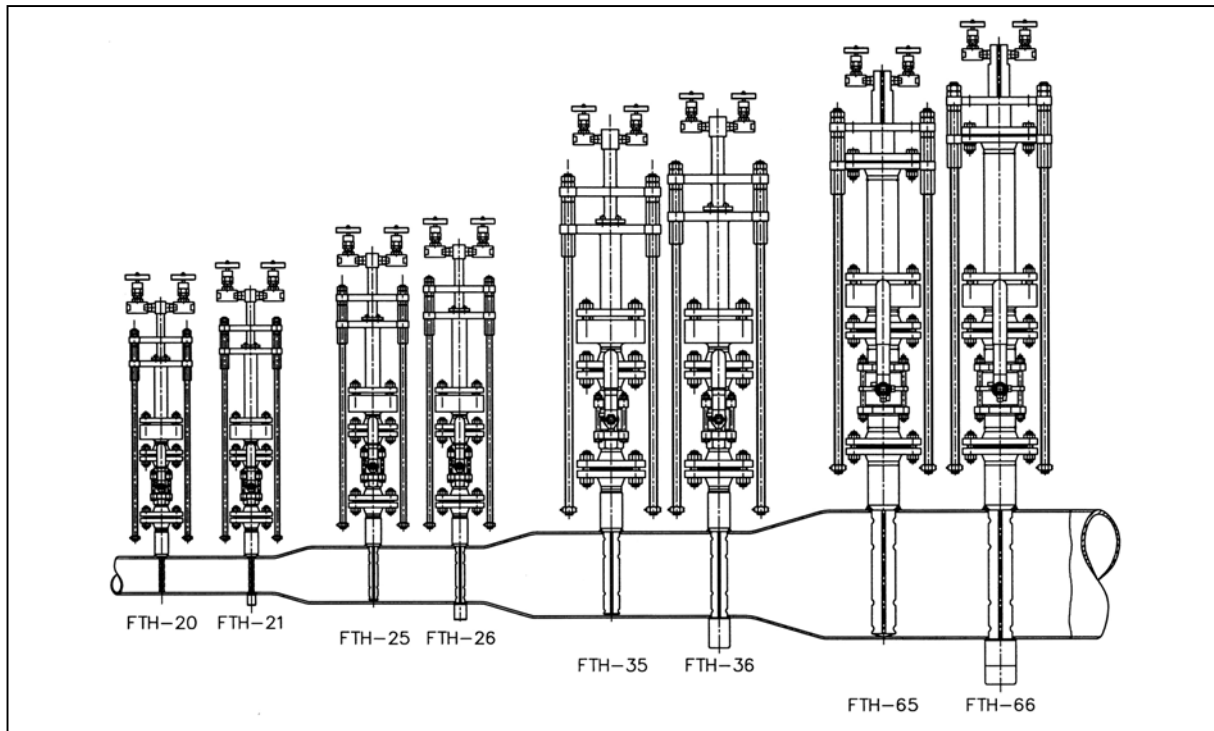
Pitot tube sensor FTH-20 w/o gear box
